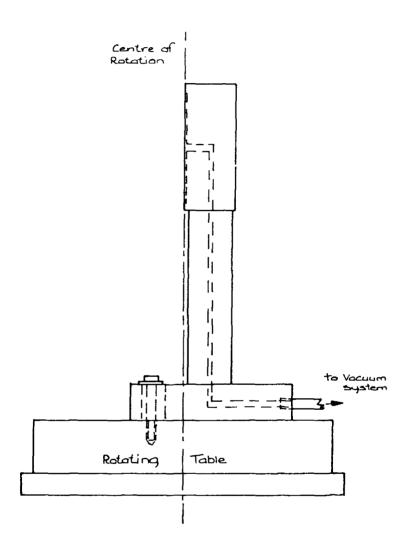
Sample holder, showing rotating table configuration and vacuum system.
